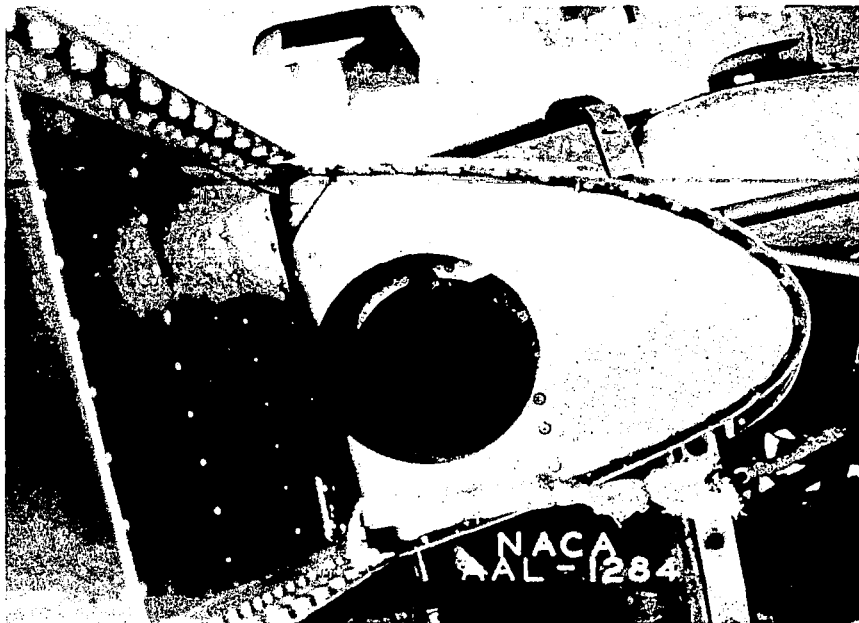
A view of the wing section at the leading edge and joint between the main wing and center-section. The end of the exhaust tail pipe, to which is attached the wing exhaust tube, is shown.
